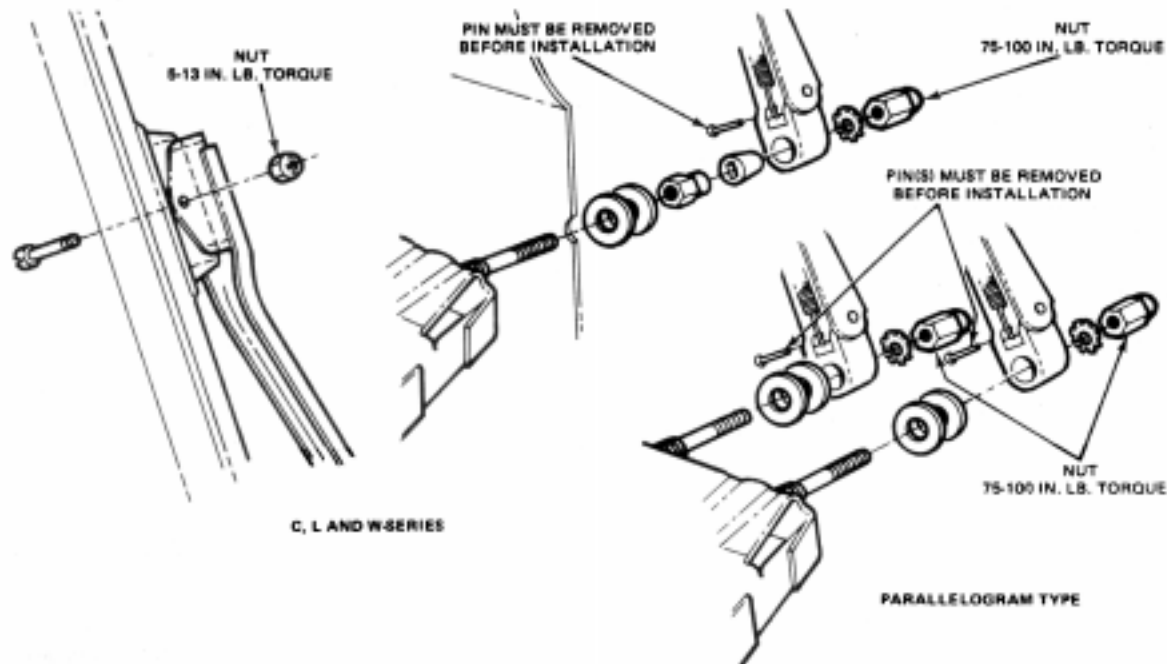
Arm and Blade Assembly Installation—C-,L-,and W-Series Trucks
